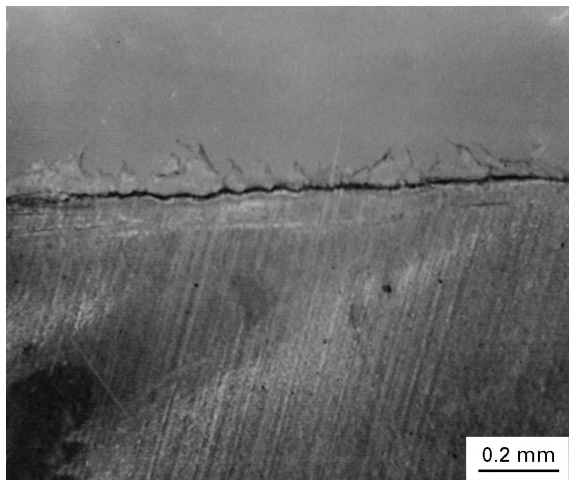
Video microscopic view showing no side crazes branching out from the edge of the fractured surface.
